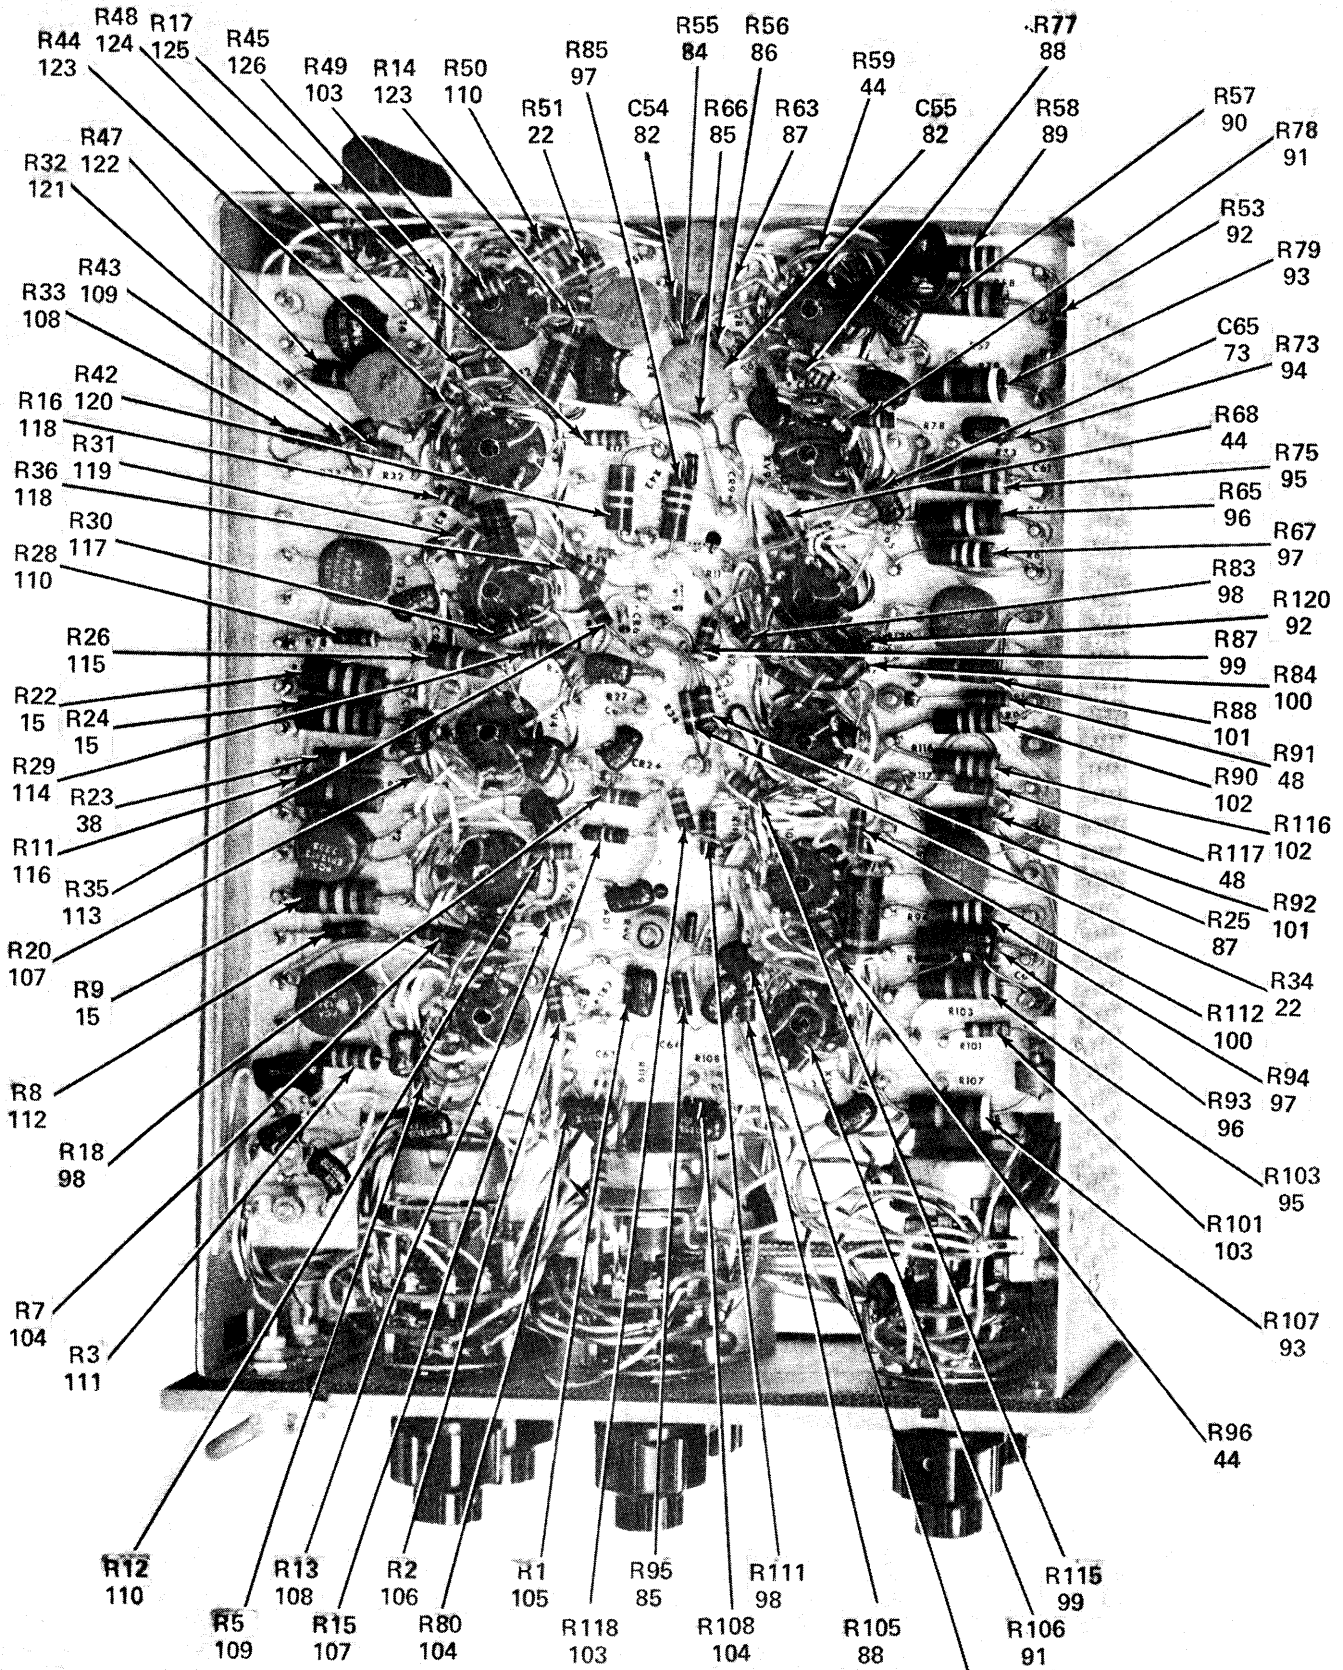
© Chassis assembly, unit 3 (sheet 2 of 4).
